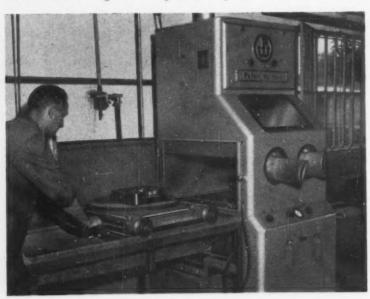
Cavity and Other Die Surfaces are Finished by the Vapour Blasting Process in this Peter Wolters Cabinet, with 400-grit Aluminium Oxide Abrasive
